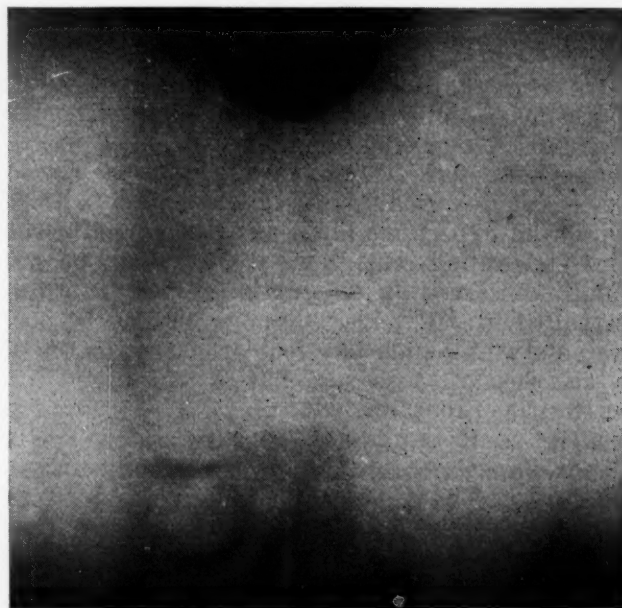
Radiograph of the plate shown in Fig. 9 after re-welding.
